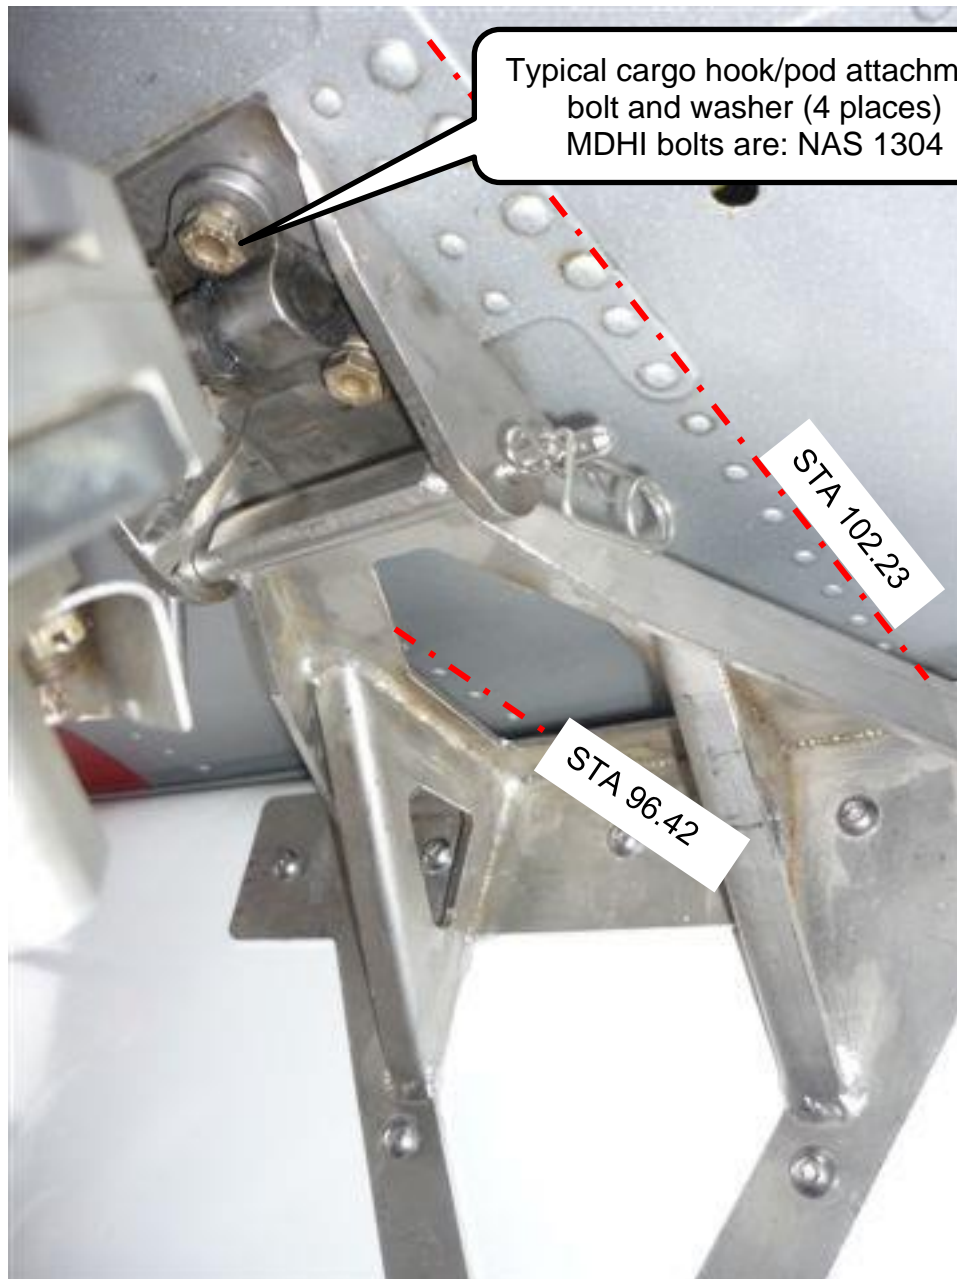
Inboard fitting of DG500 Cargo Pod
